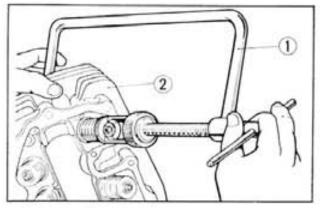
(i) Valve lifter (2) Cylinder head
